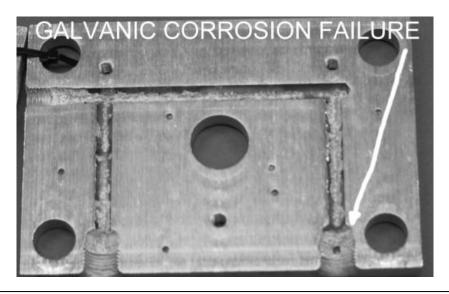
Photo of an aluminum SCR cooling block showing Galvanic Failure
